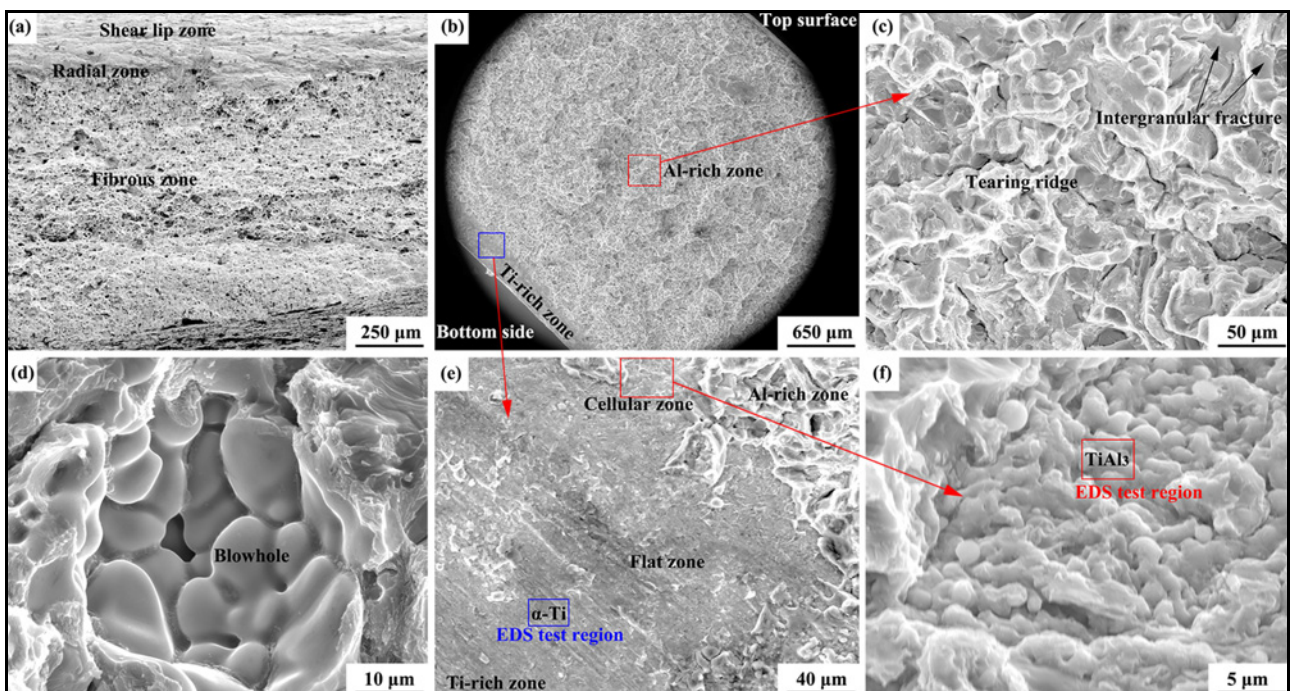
Fractography for fracture mode 1 (a) and for fracture mode 2 (b)–(f).
